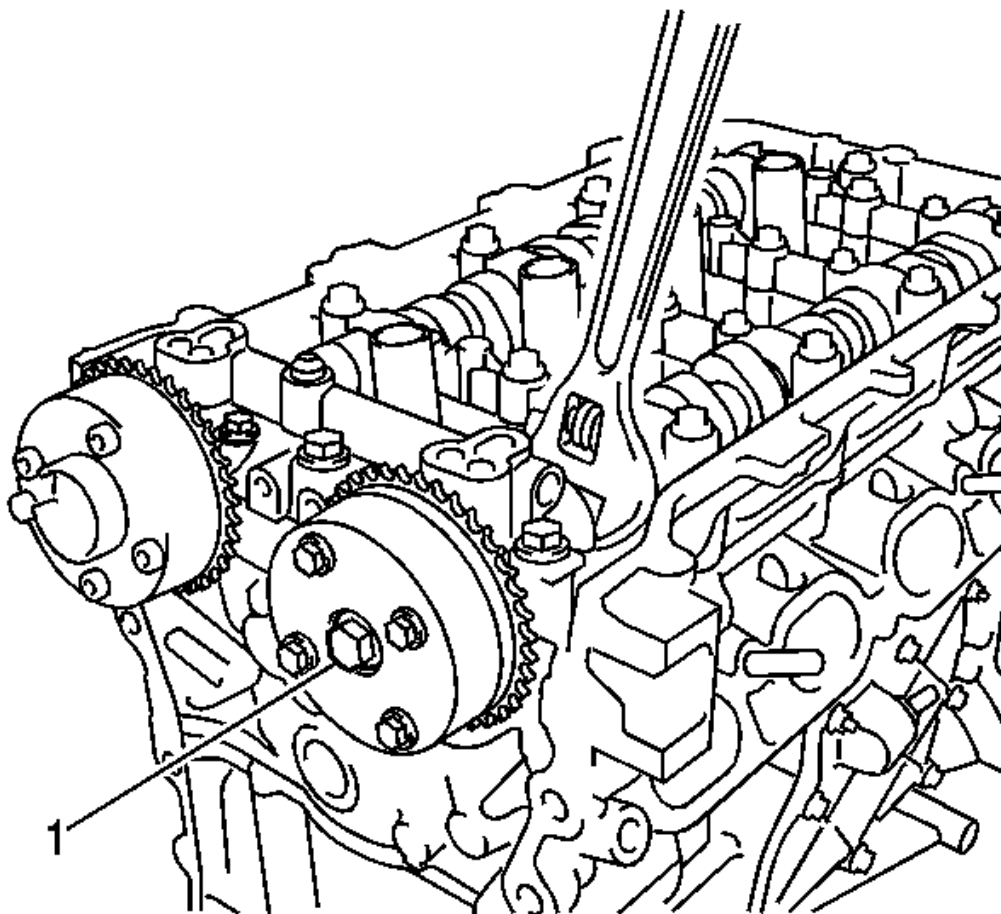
Tightening Camshaft Timing Gear Flange Bolt
